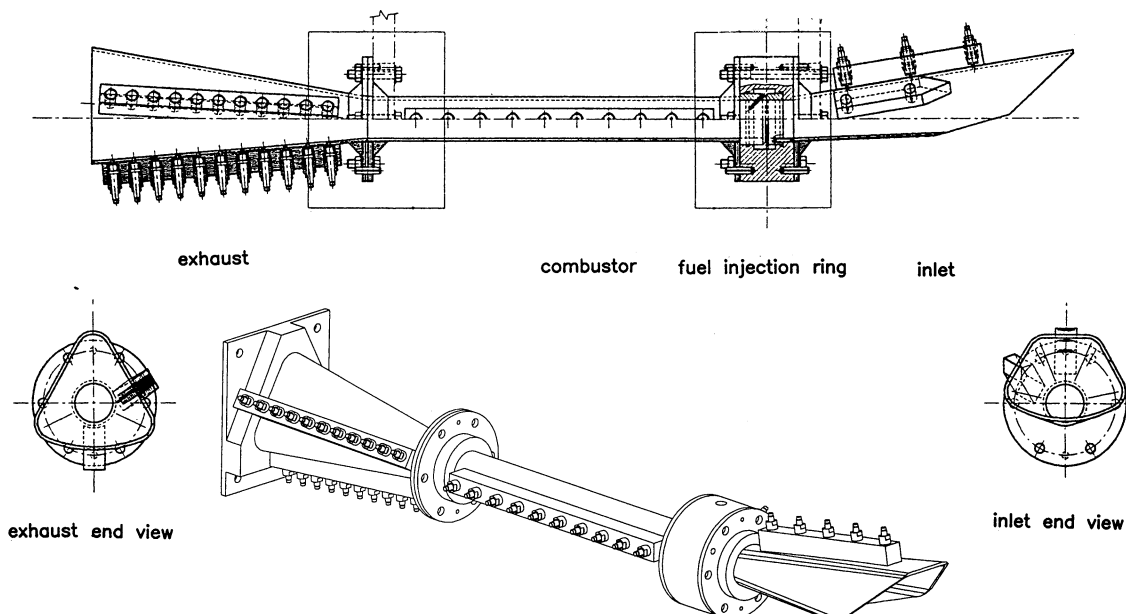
Front, side, and rear views of the CSM scramjet module.
